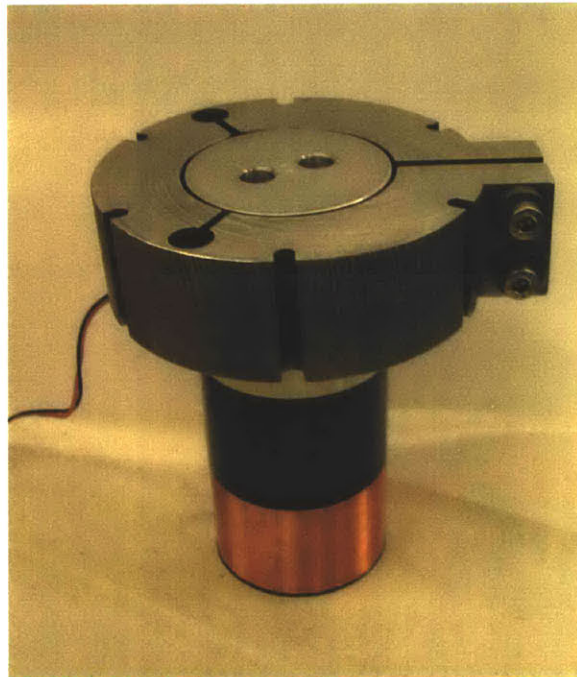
Photograph of sample holder with sample, target shaft and voice coil coil holder.
